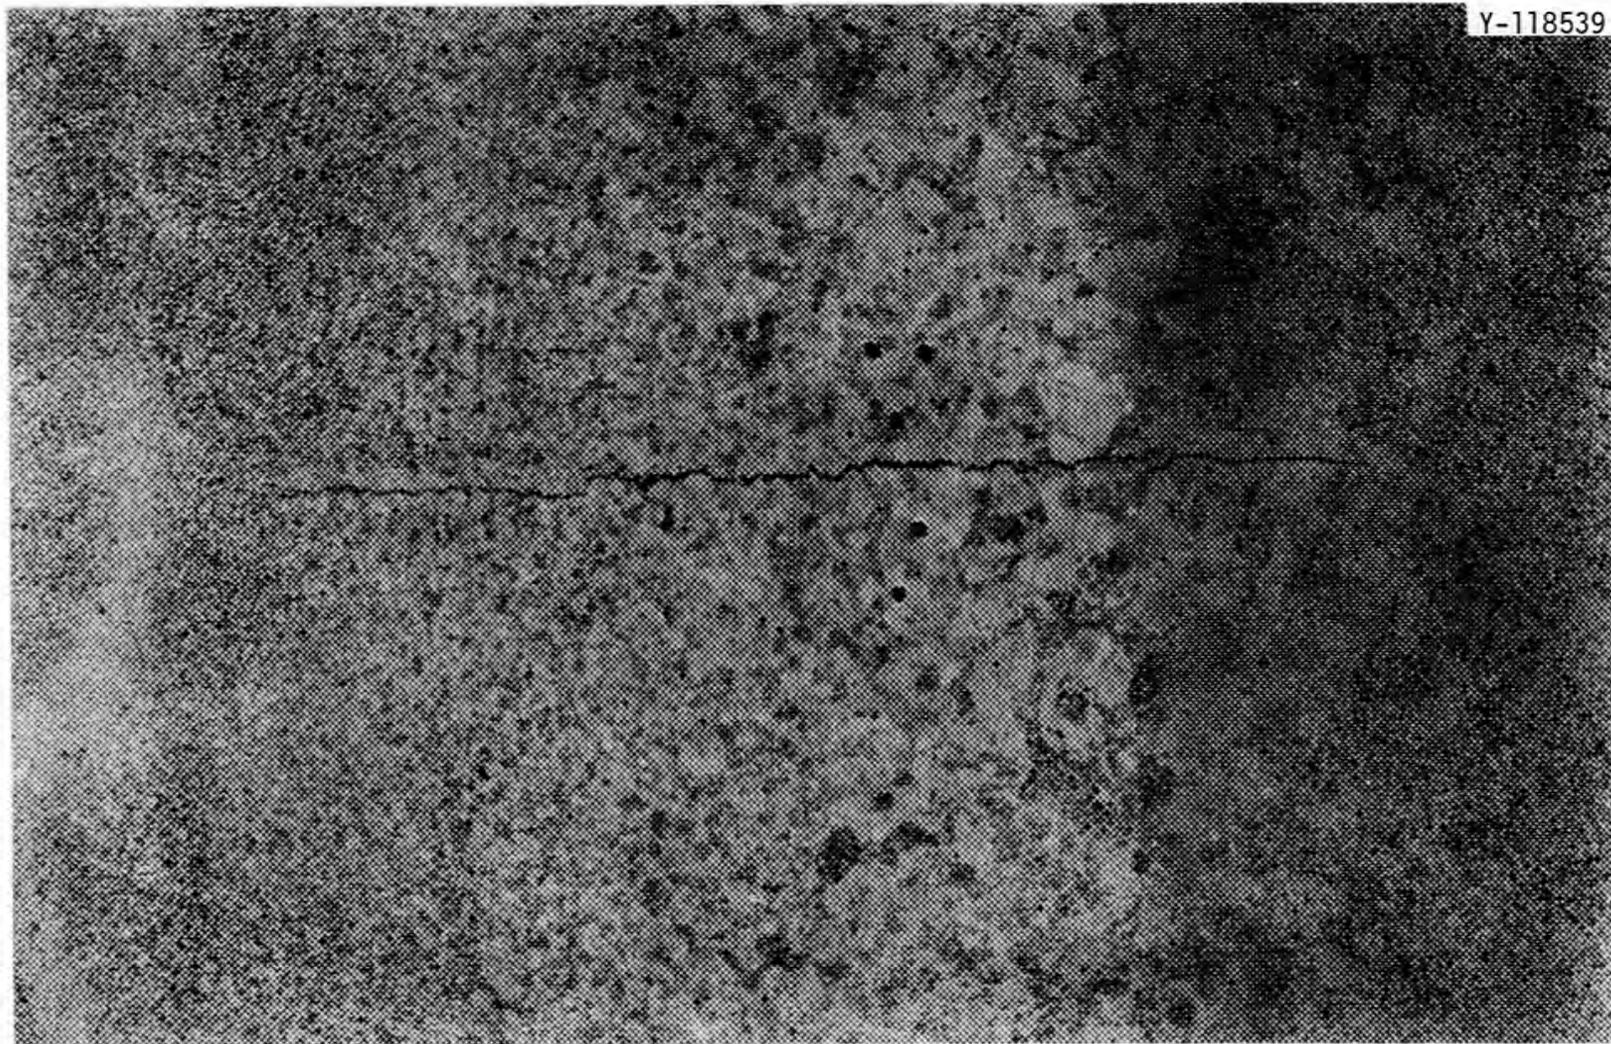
A preexisting welding crack in a hard spot (380–400 DPH) of a heat-affected zone in a low-alloy weldment. Source: R. Weck, "Brittle Fracture of a Thick-Walled Pressure Vessel," *Br. Weld. Res. Assoc. Bull.* 7(6) (1966), Fig. 38. Reprinted by permission.
